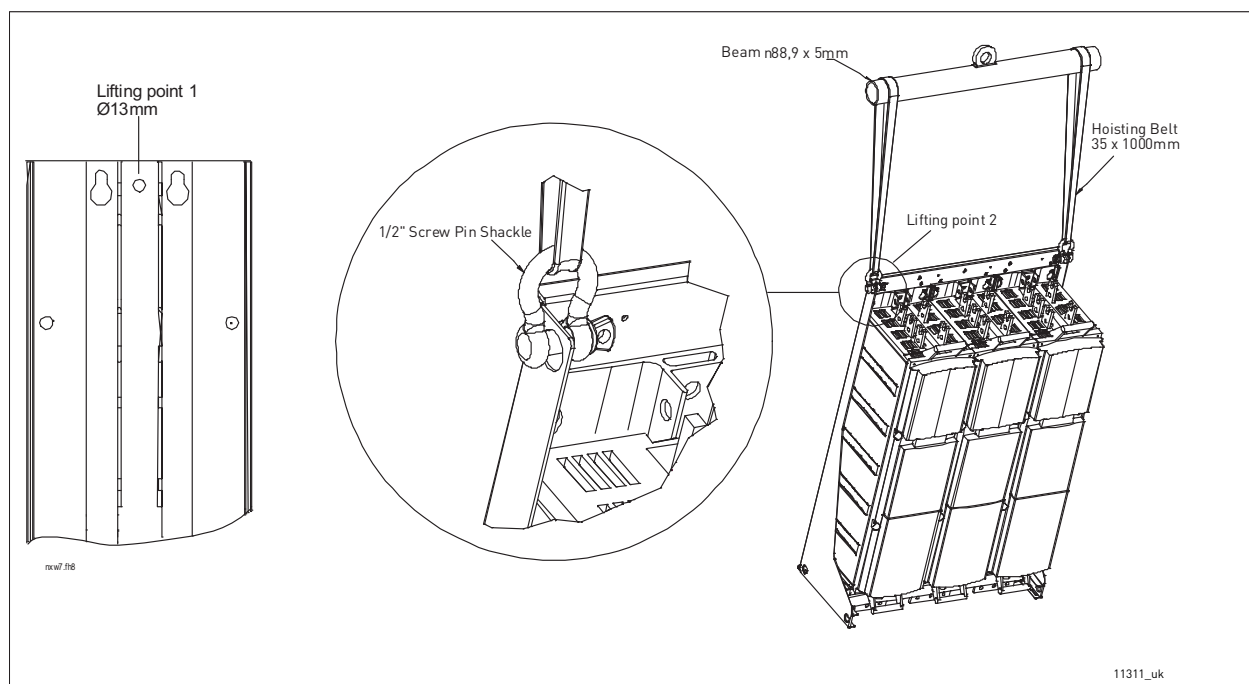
Lifting points for drives consisting of one module (left) and several modules
